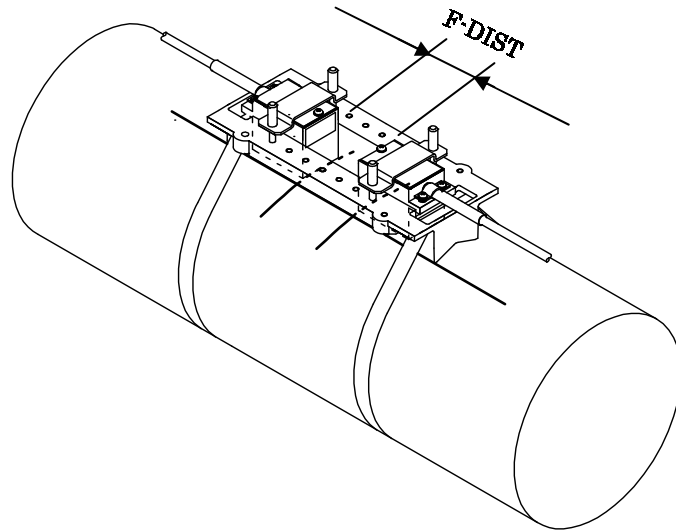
Checking the transducer mounting interval (1)
